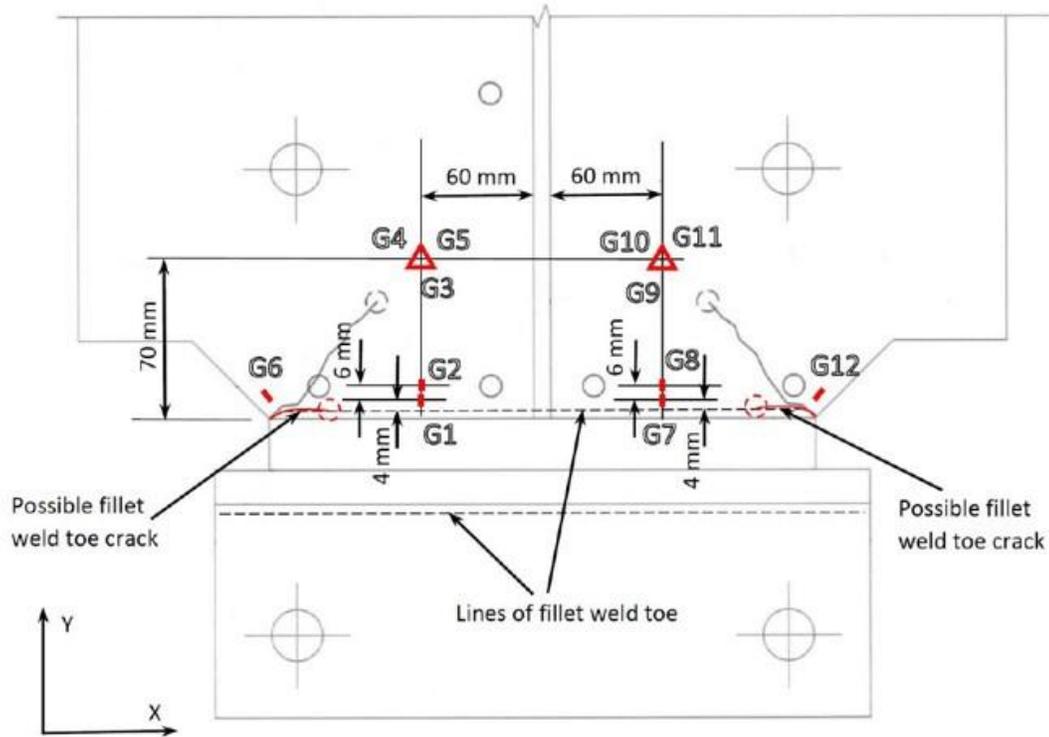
Detailed engineering drawing showing the placement of twelve FBG sensors.
